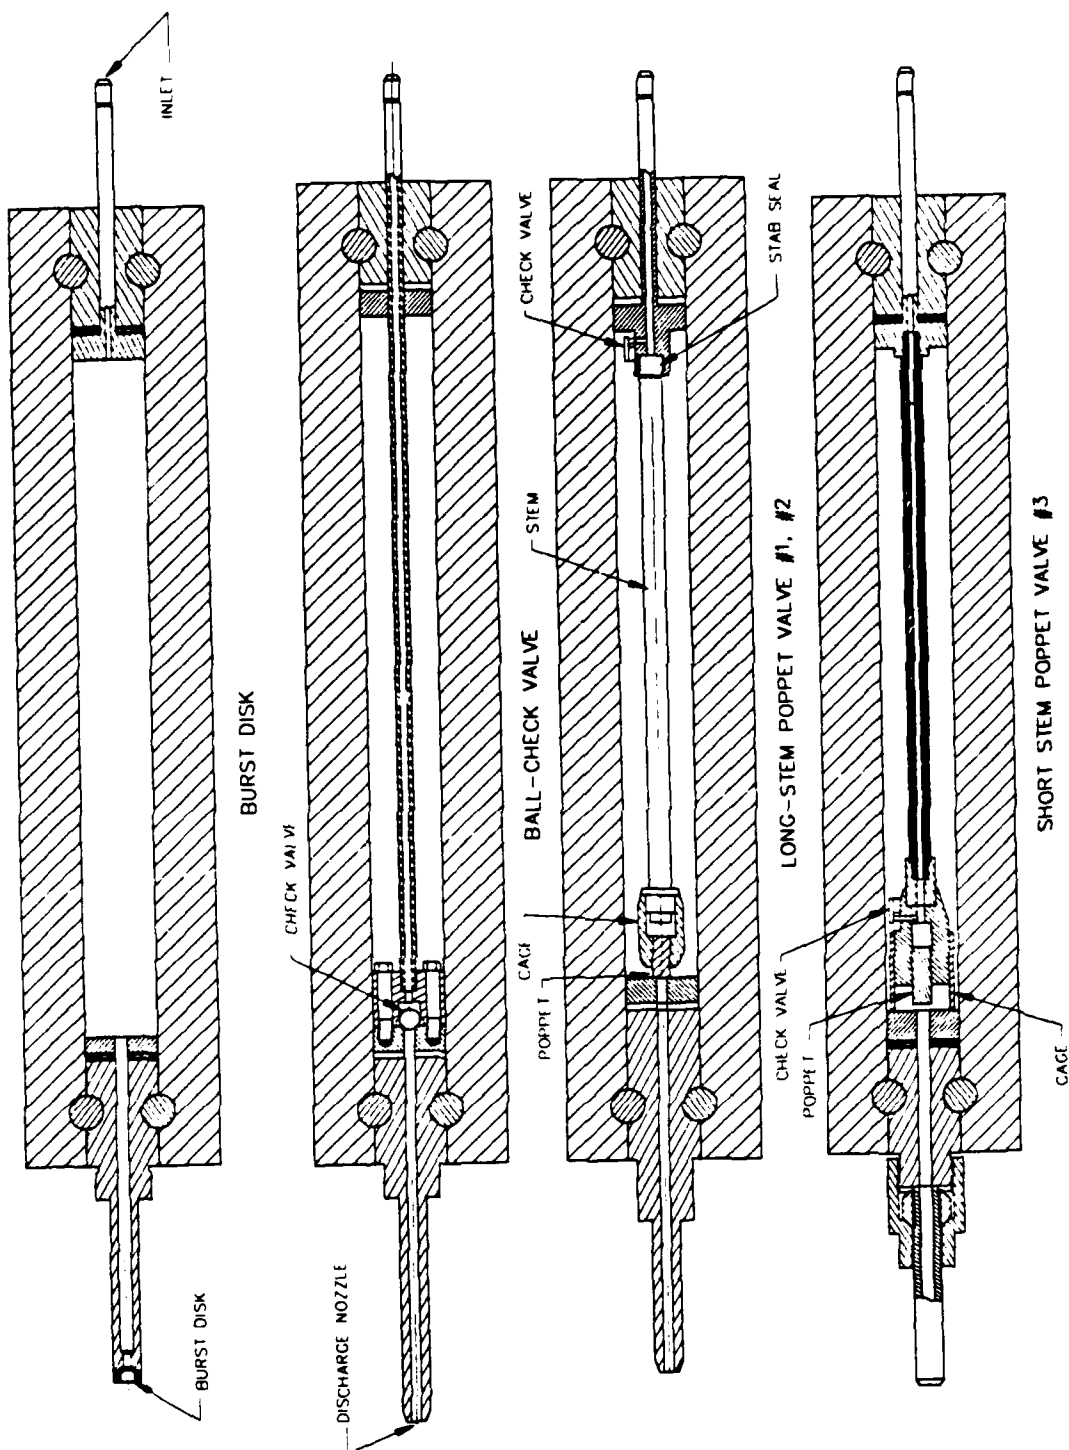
Burst Disk Assembly and Discharge Valve Designs
